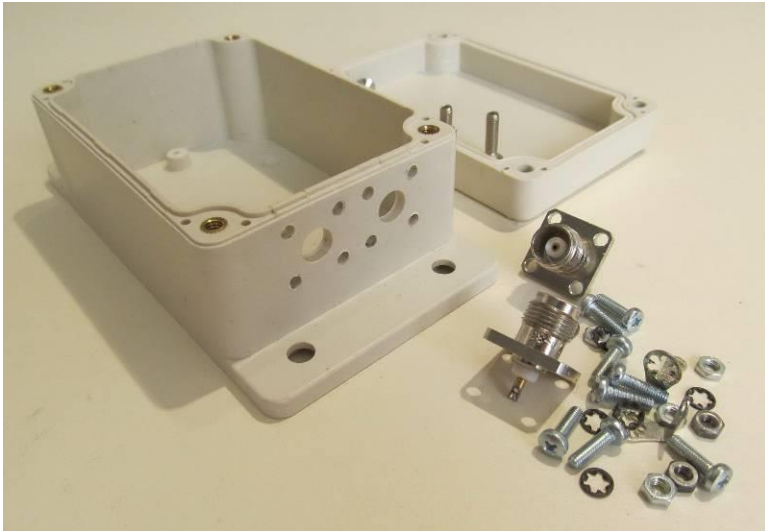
~ Choke enclosure ready for installation of TNC flange-mount connectors. All connector holes were cut with brad-point drill bits and deburred. ©2020 W. Reeve
